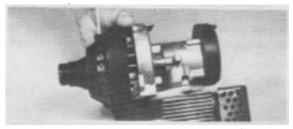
Pull slowly on starter rope to engage starter dogs, then install the starter housing mounting screws (ref. Fig. 1).
